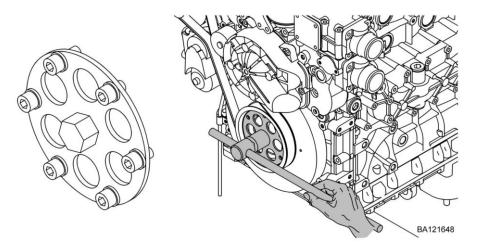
Turning device - Crankshaft belt pulley attachment special tool no. 30a
